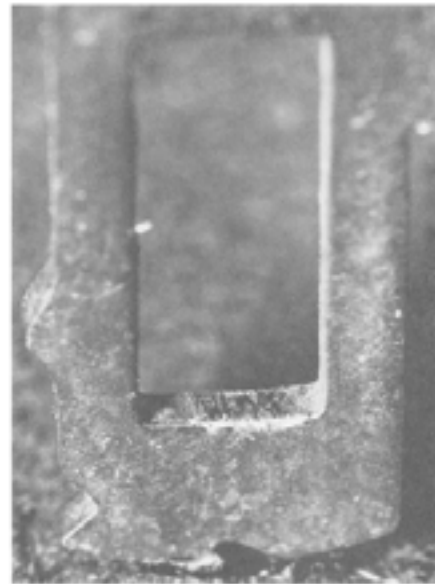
Disc tumbler from a lock cylinder that had been picked with a rate pick. Tumbler width is 6.62 mm (0.261 in.) and thickness is 0.73 mm (0.029 in.).
